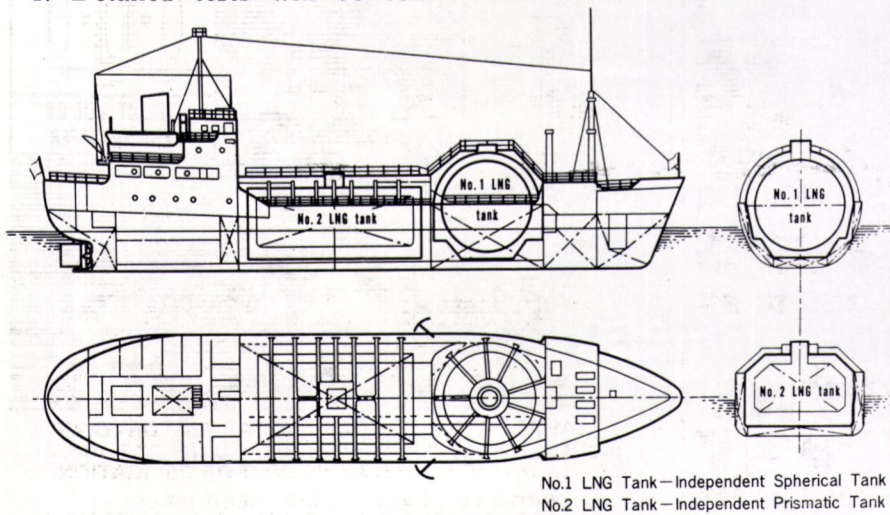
Inboard profile and deck plan of experimental ship being built in Japan.
